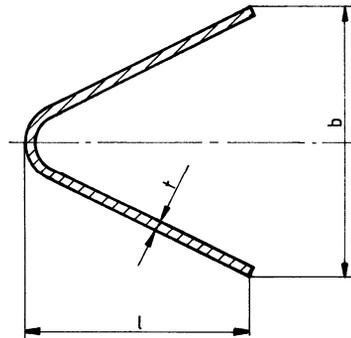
Welded sternframe propeller post
